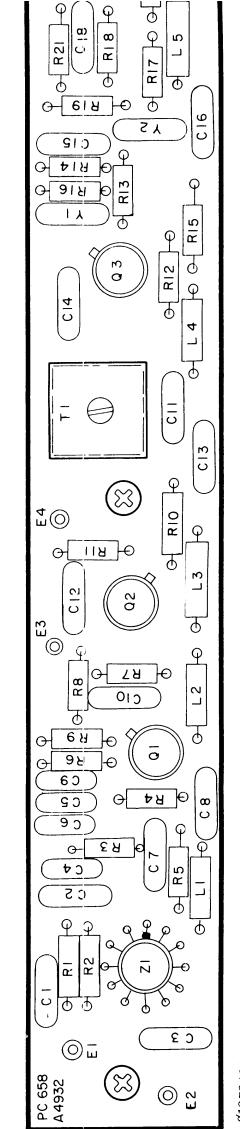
First Mixer Assembly Z101, Component Location and Parts List
